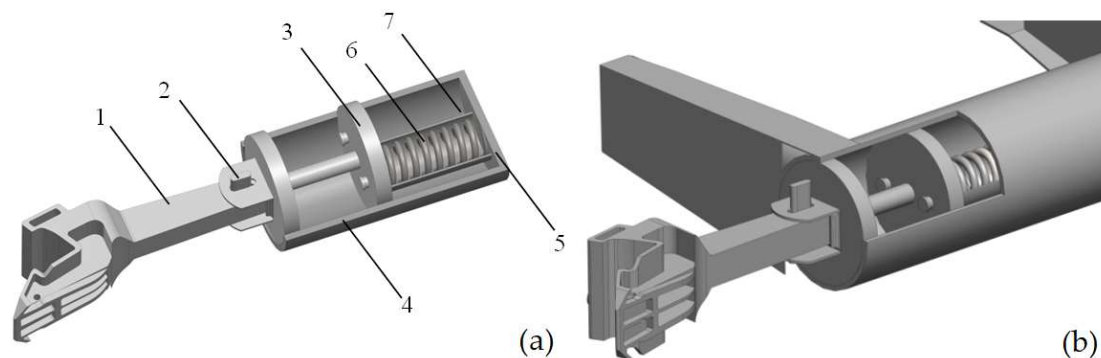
Sh-2-B-90 absorbing mechanism: 1, body; 2, friction wedge; 3, pressure cone; 4, nut; 5, bolt; 6, external spring; 7, internal spring.
